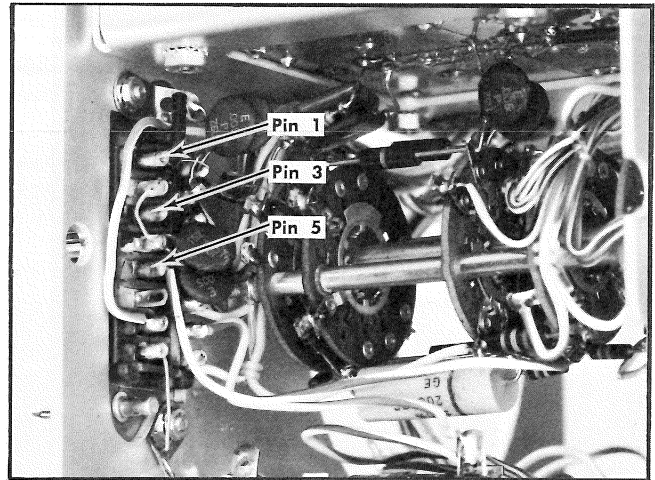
Bottom view of the Calibration Fixture, showing interconnecting-plug pin locations.
